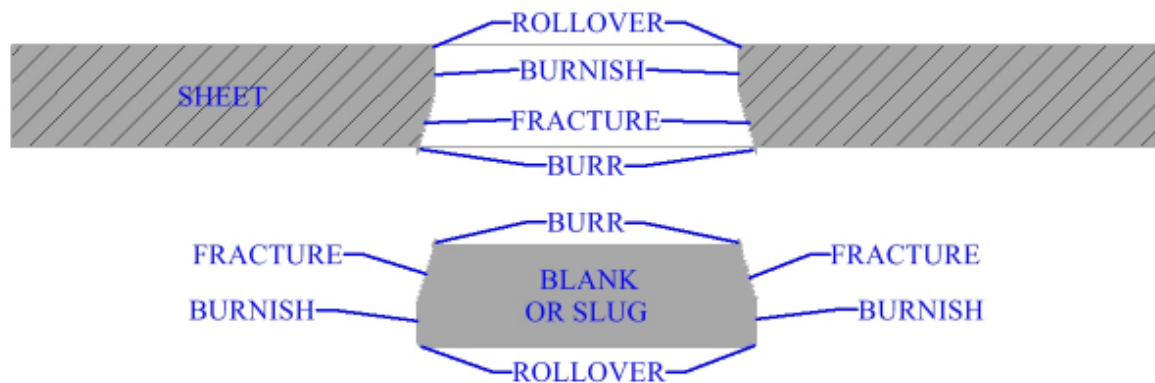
Cut profiles of the hole and the blank. Taken from [6].
